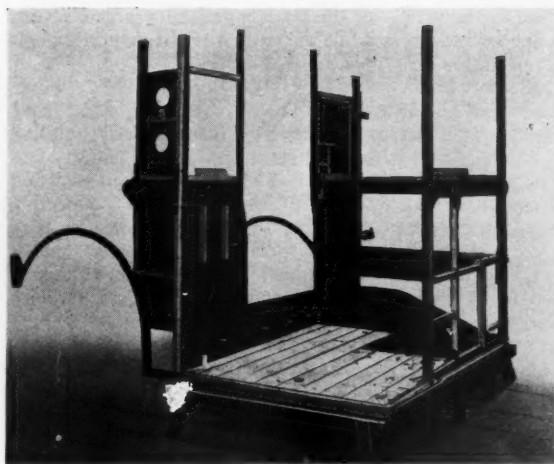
Rear platform and partition unit ready for transfer to the lower saloon final assembly fixture.
